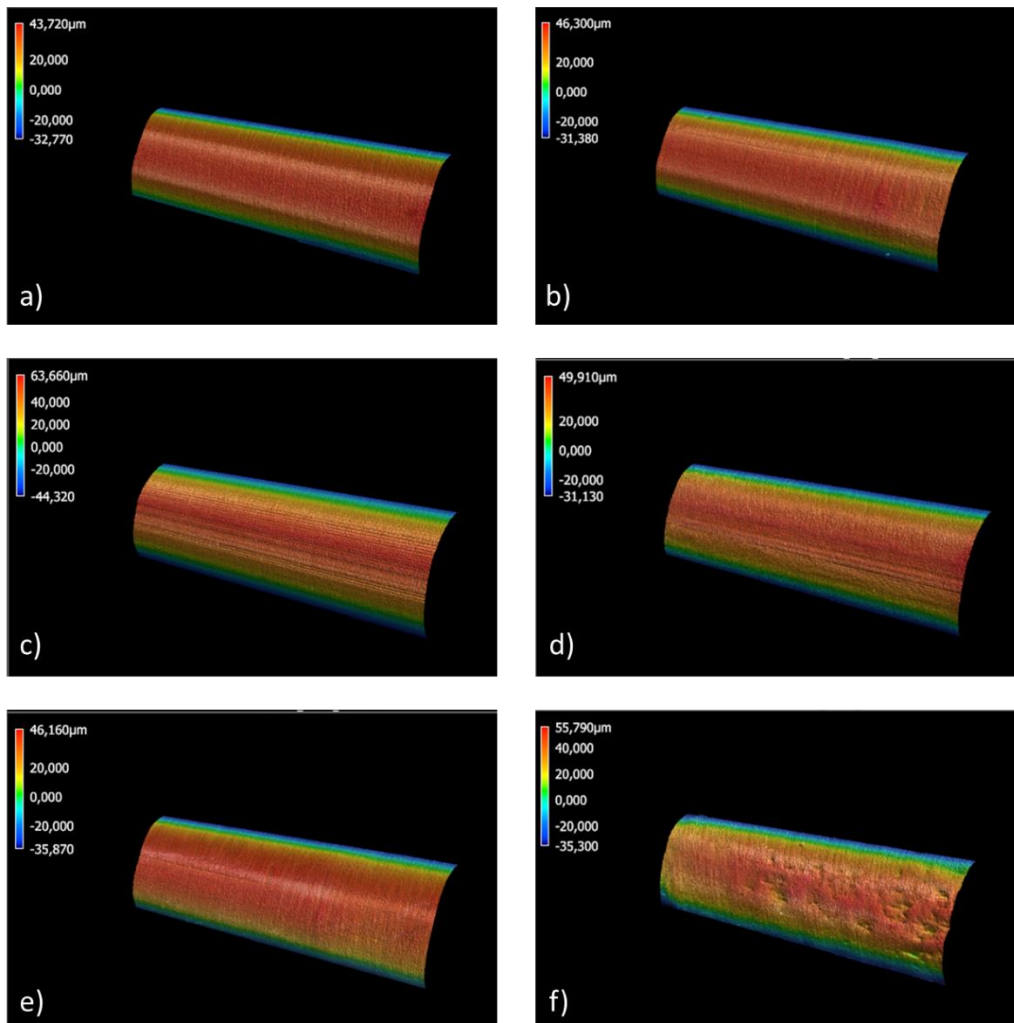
Surface images of inserts for deep-drawing tests; a) untested middle insert, b) untested edge insert, c) middle insert tested with DP600+Z, d) edge insert tested with DP600+Z, e) middle insert tested with DC04+ZE, f) edge insert tested with DC04+ZE
